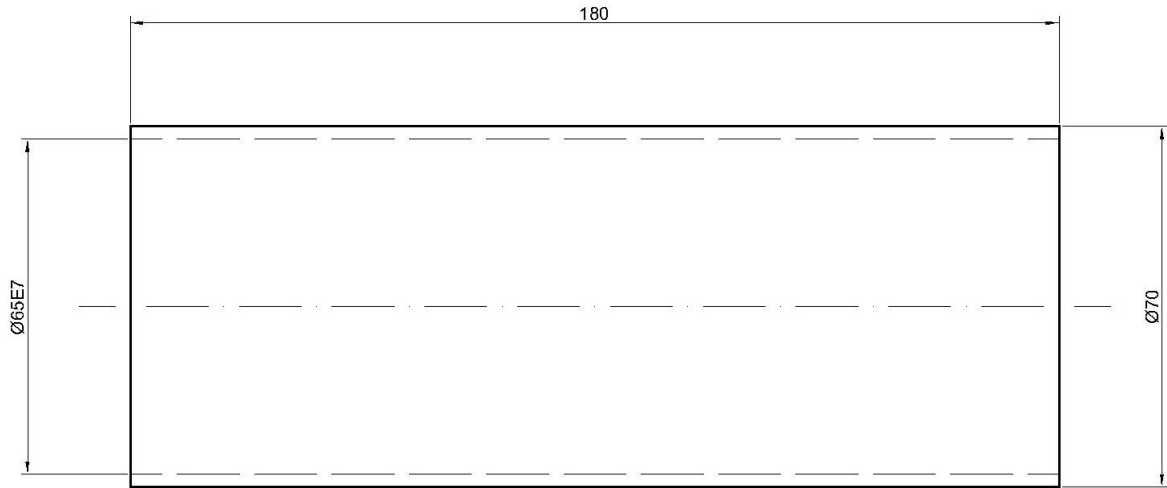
Drawing of the spacer between the gear and bearing A.
